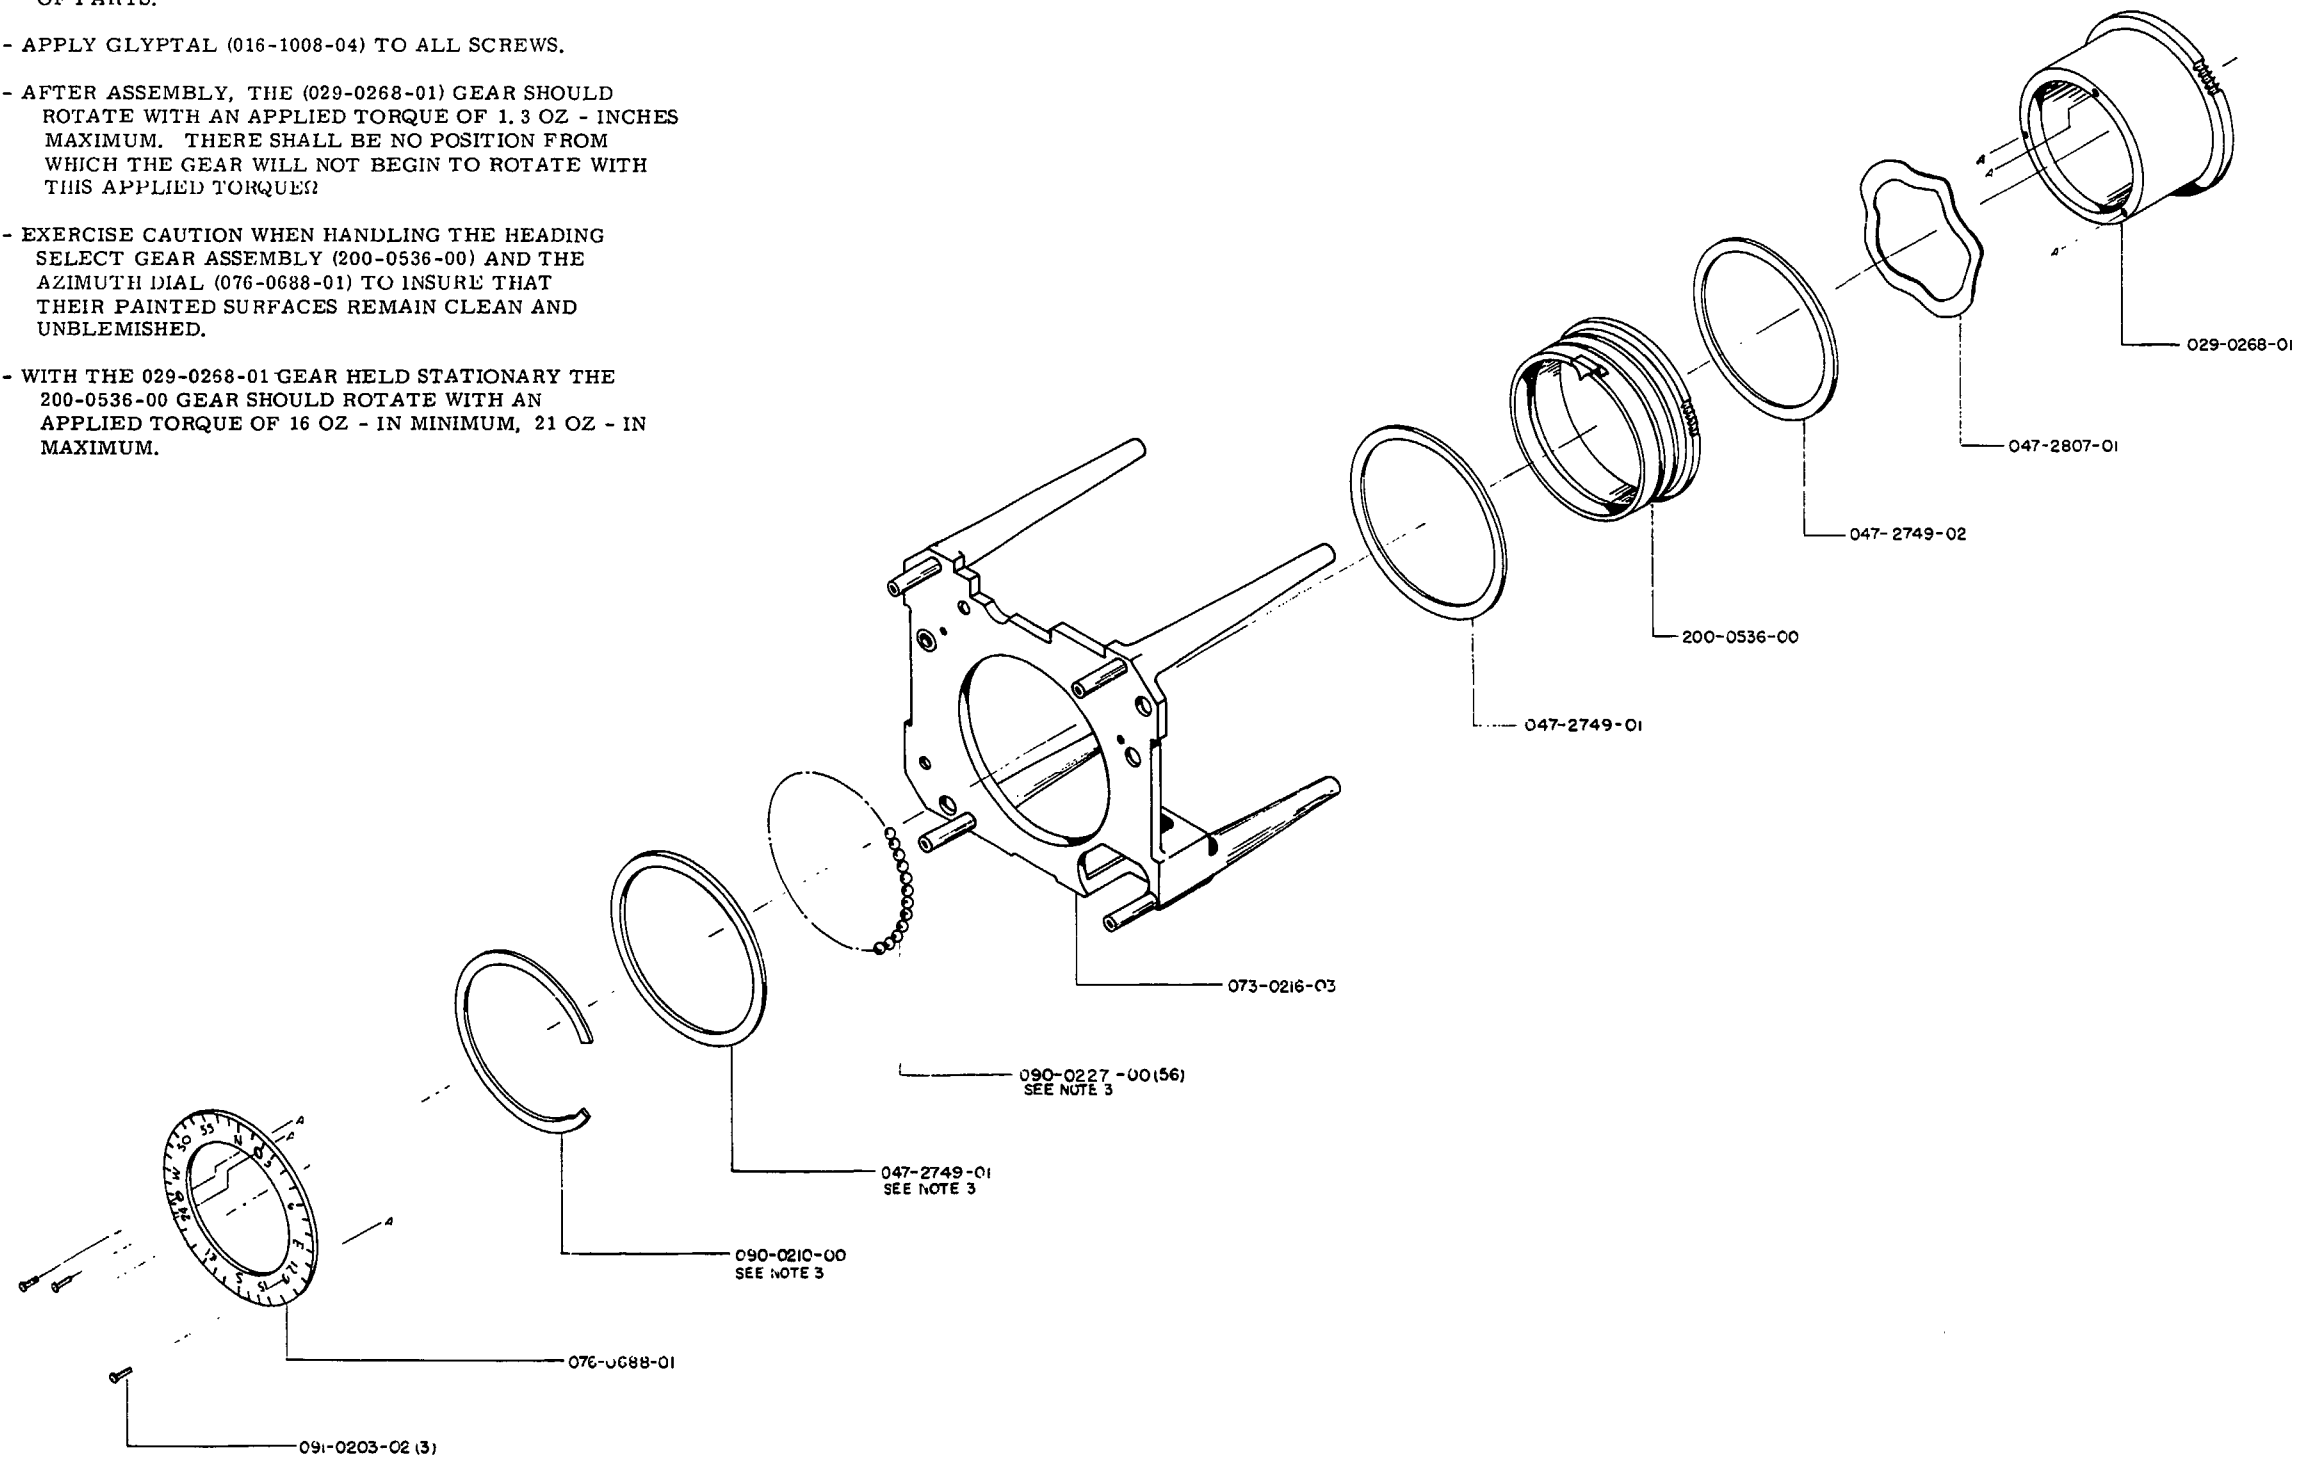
A KI 525 FRONT FRAME ASSEMBLY
